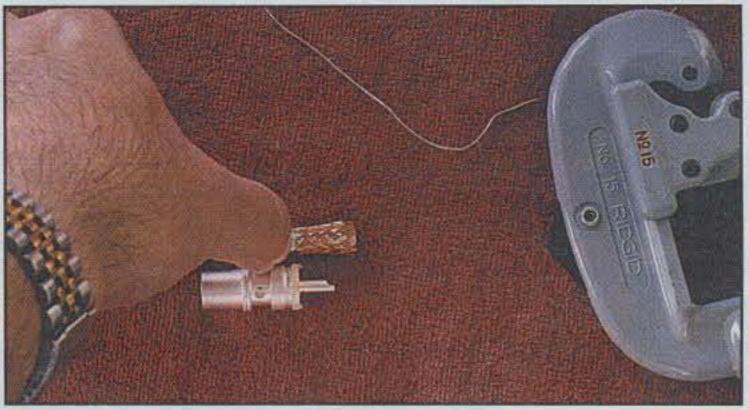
Again, my thumb indicates where to cut. The shield and center insulator will be cut so that the cable will fit into the connector body, and stop where the Teflon® insulator joins the connector body.
